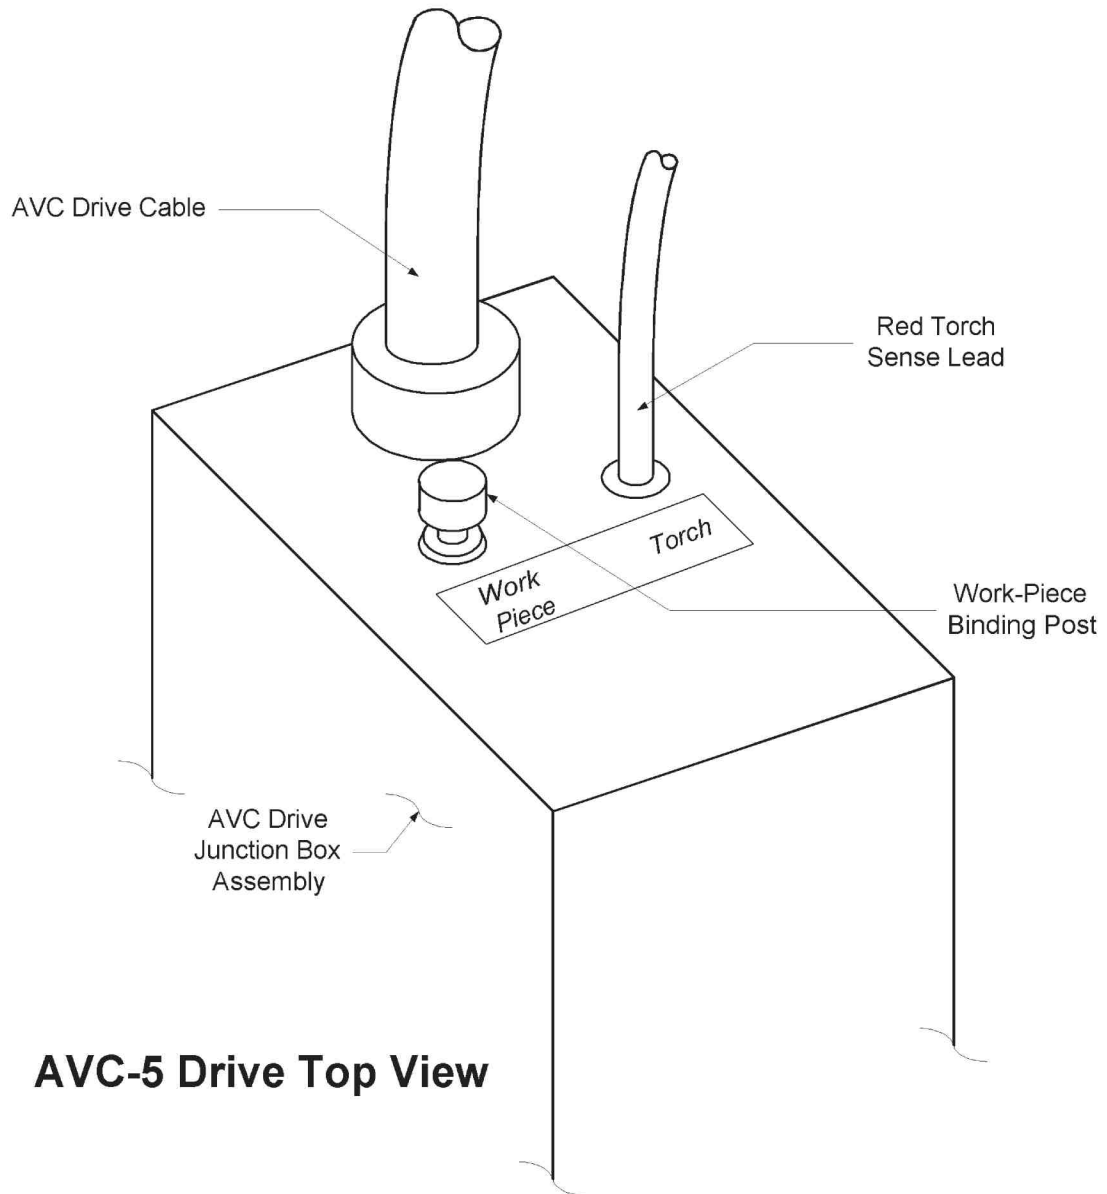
AVC-5 DRIVE WORK-PIECE CONNECTIONS
